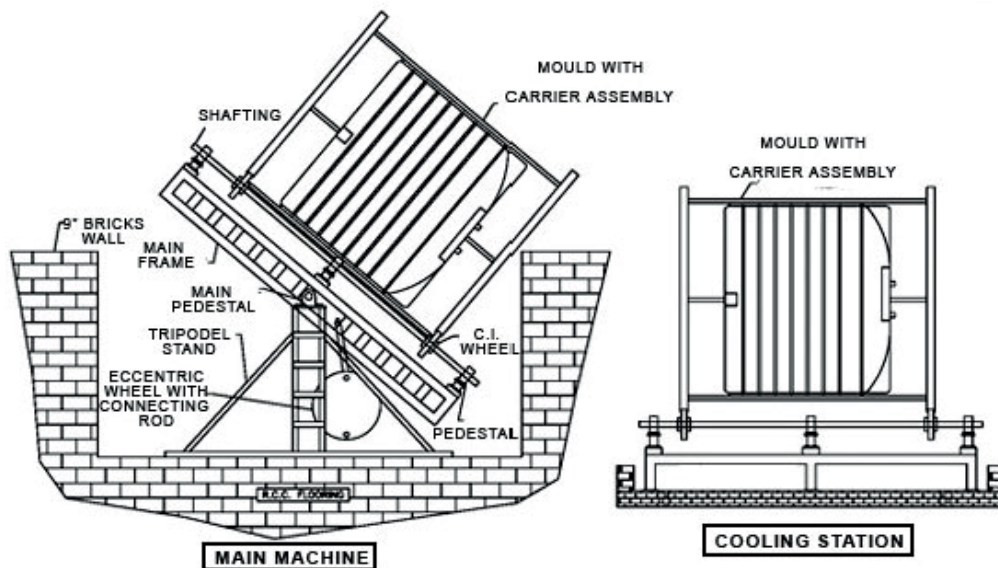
Tank moulding machinery. (Source: NAROTO: <http://rockrollmachine.in/>)
